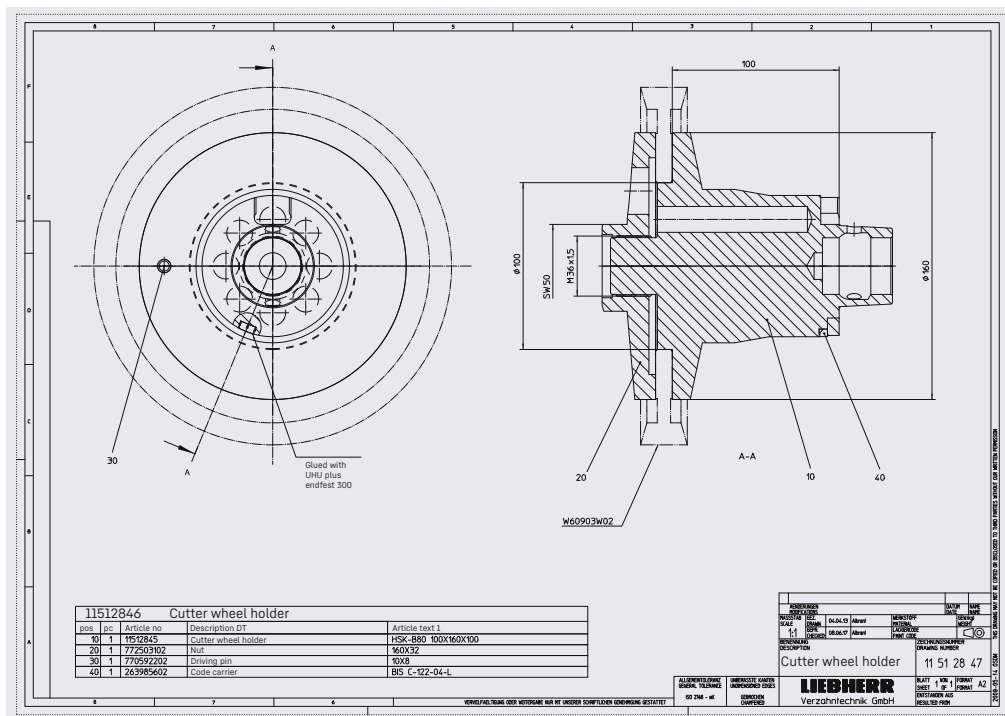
Position for attaching the tool holder on an HSK-B80 holder
